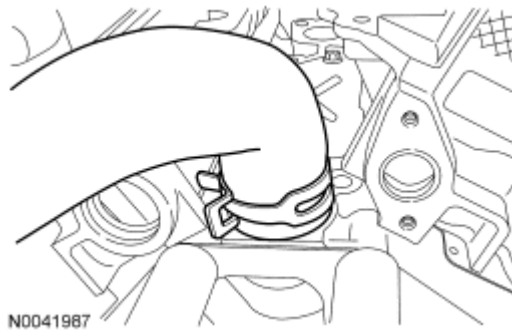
Locating Coolant Pump Hose From Cylinder Block Outlet
